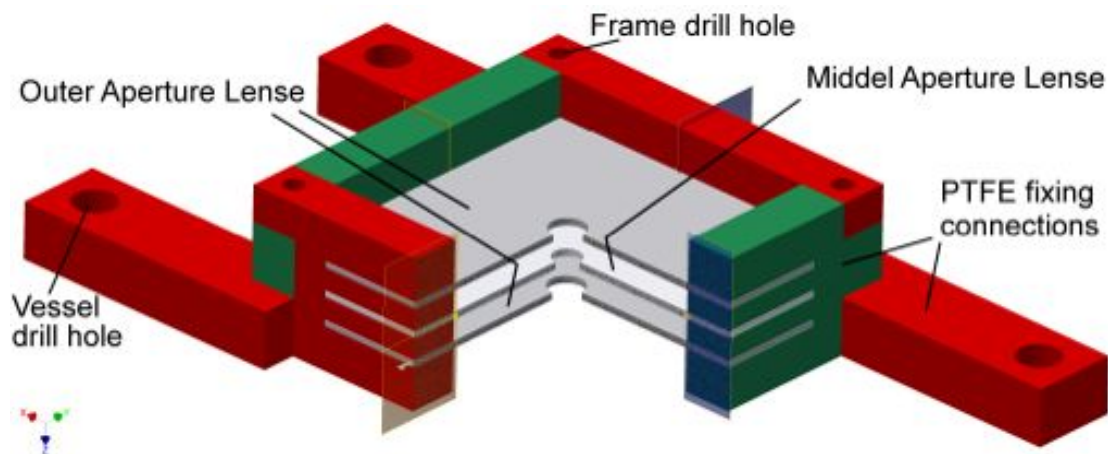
This CAD draft shows the lensing system consisting of three aperture plates enclosed by PTFE frame segments. The segments are equipped with interlocking laps at each side and a drilled hole through these laps to allow a screwed fixation of the single frame segments. The positioning of the aperture plates within the frame is achieved by additional metal noses at each side of the plates and corresponding slots in the frame segments.
